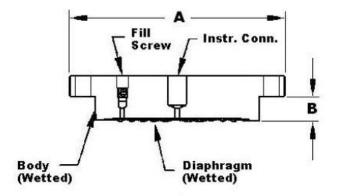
Seal Dimensions (Chemical TEE "Taylor Wedge" Seals
